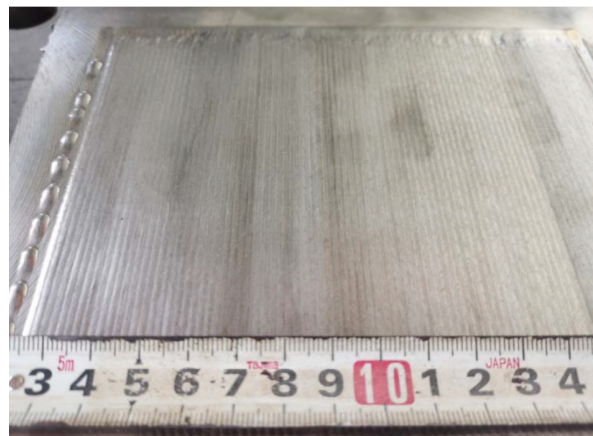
Appearance of the welded plate with upgraded parameters.
